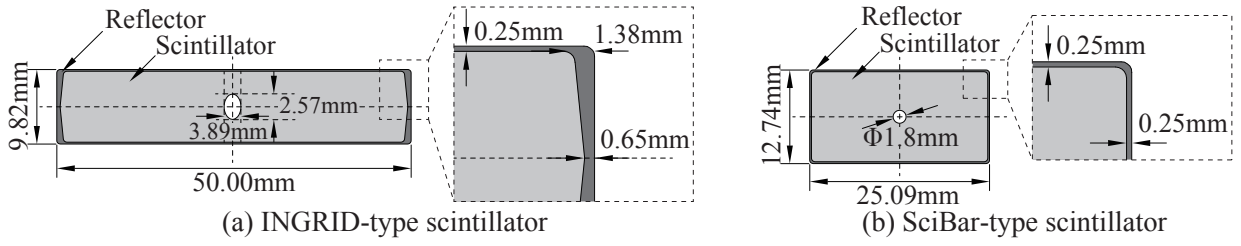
Cross sectional dimensions of the scintillator strips.
